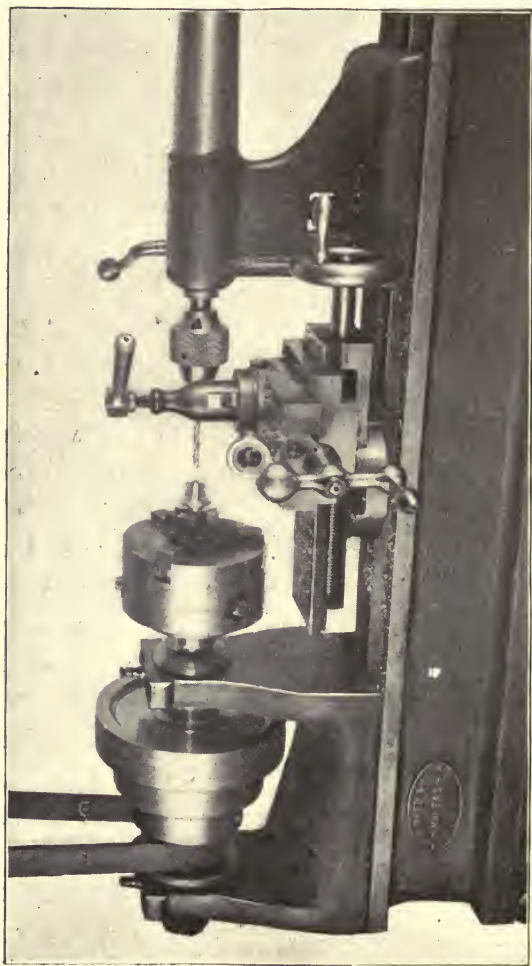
DRILLING INLET VALVE FOR VALVE STEM.
